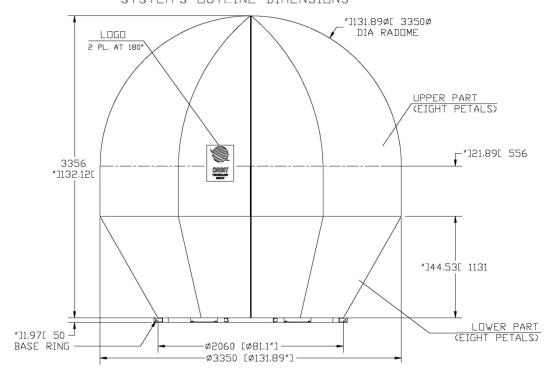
Above Deck Equipment (ADE) Layout and Dimensions (2 of 2)
